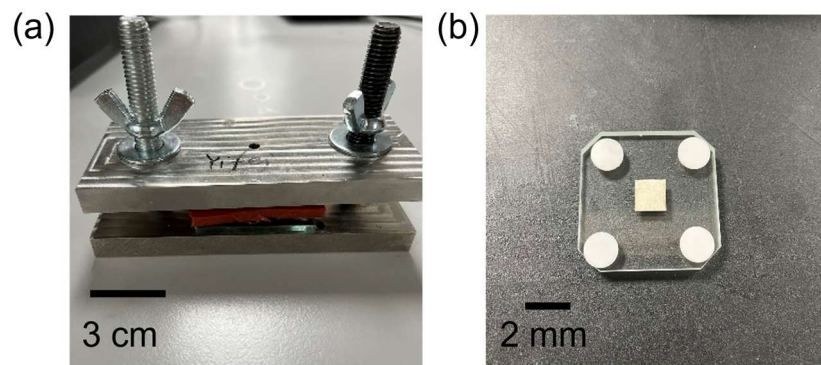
(a) The fixture and (b) the sample mounted on the glass plate.
